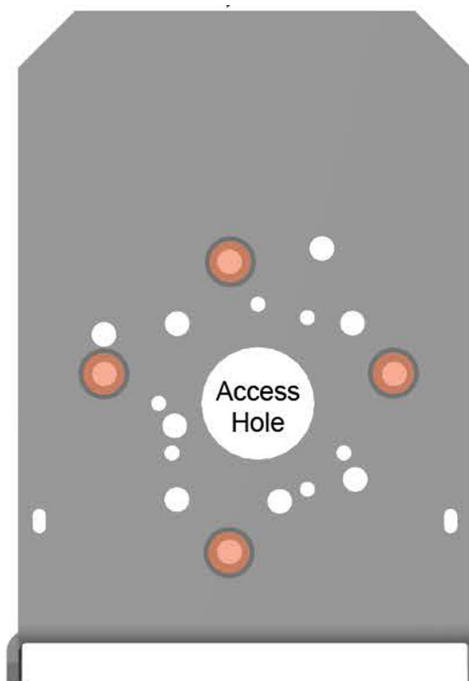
CM225 mounting holes used for the LP02 are indicated in orange
